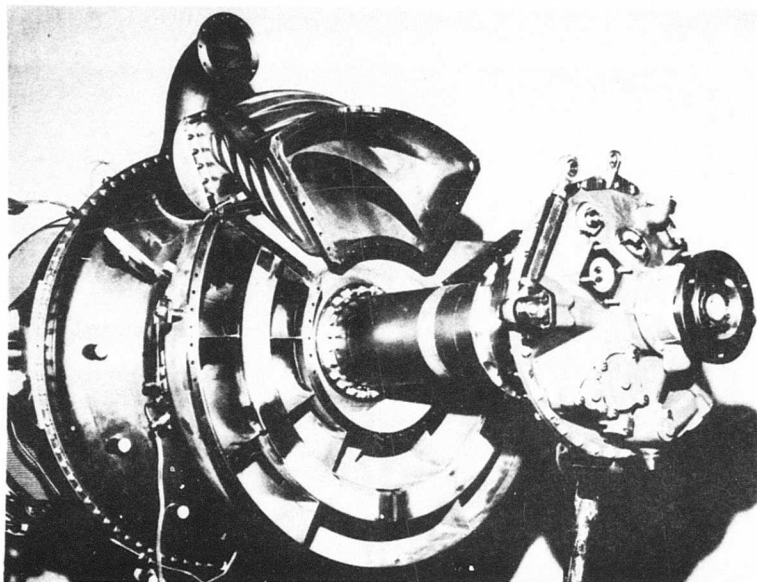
Partially Assembled Engine; Reduction Gearbox at Right.
